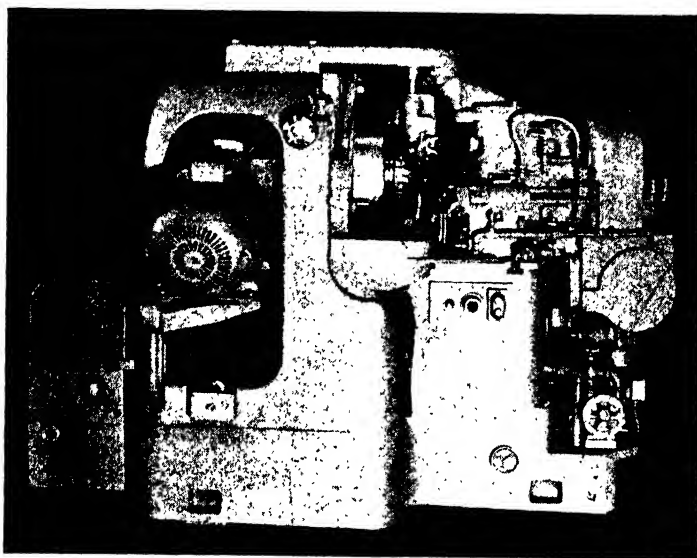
Gleason machine for rough-cutting spiral-bevel gears.
